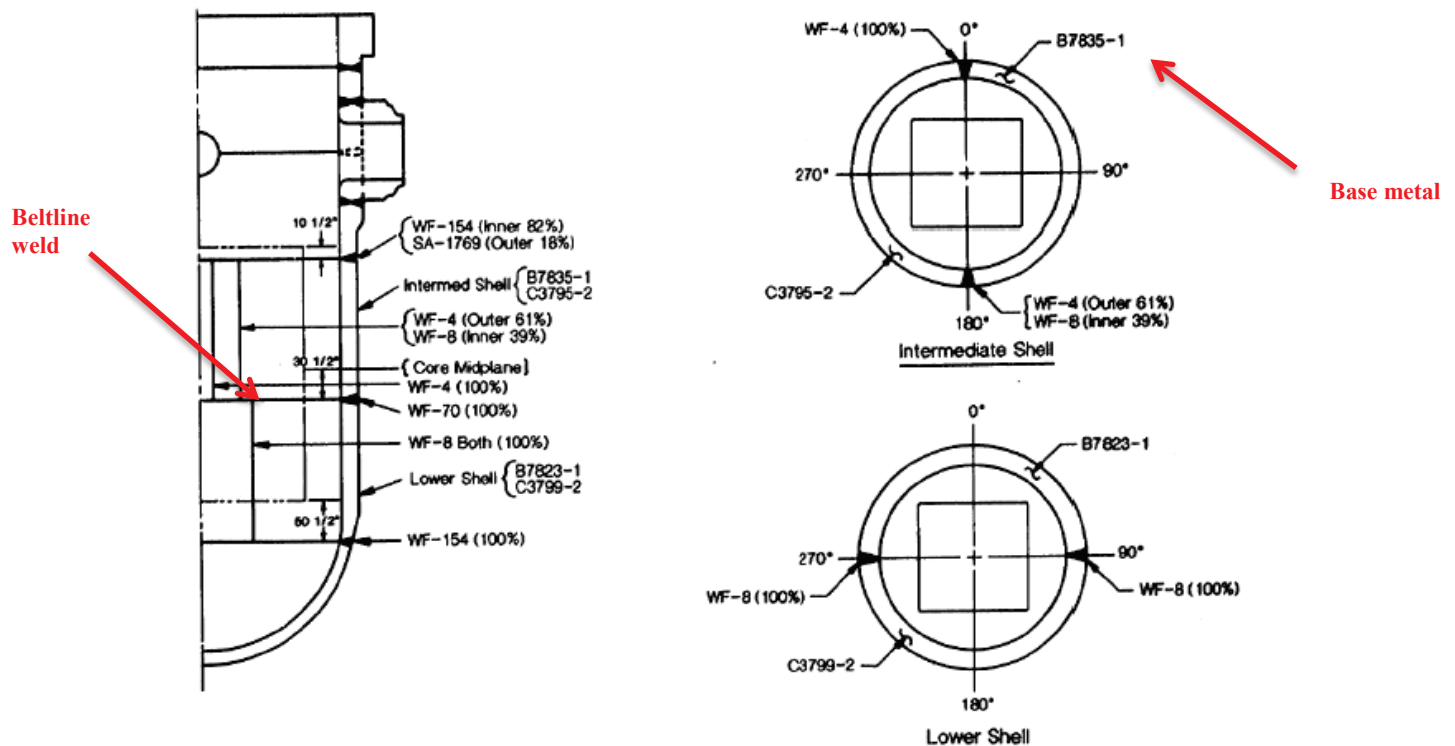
Location of materials (weld and base metal) used in the fabrication of the Zion Unit 1 beltline (intermediate shell to lower shell), two vertical welds above the beltline, and base metal heats [16].
